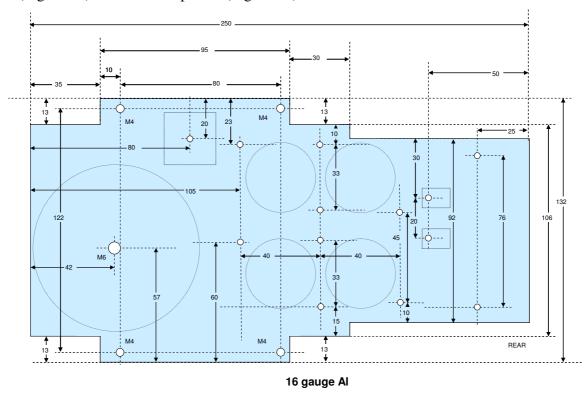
The power supply plate, capable of housing additional reservoir capacitors which may be required for ultra-fast scanning. A tagstrip is mounted on the right of the unit (76 mm hole separation) and connections soldered directly to this.
